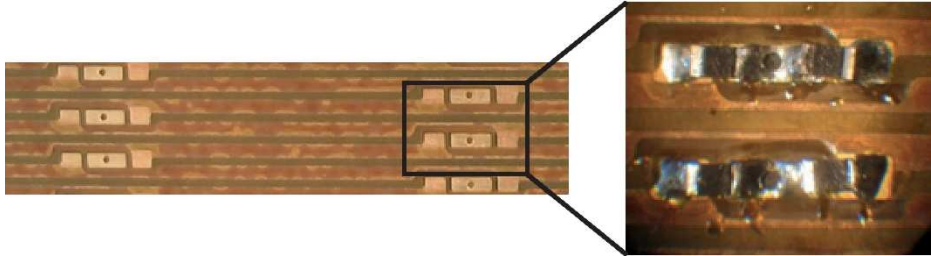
Photograph of the strip-line electrodes. The inset shows a photograph of the enlarged view on the SMD 0805 resistors soldered on the respective pads.
